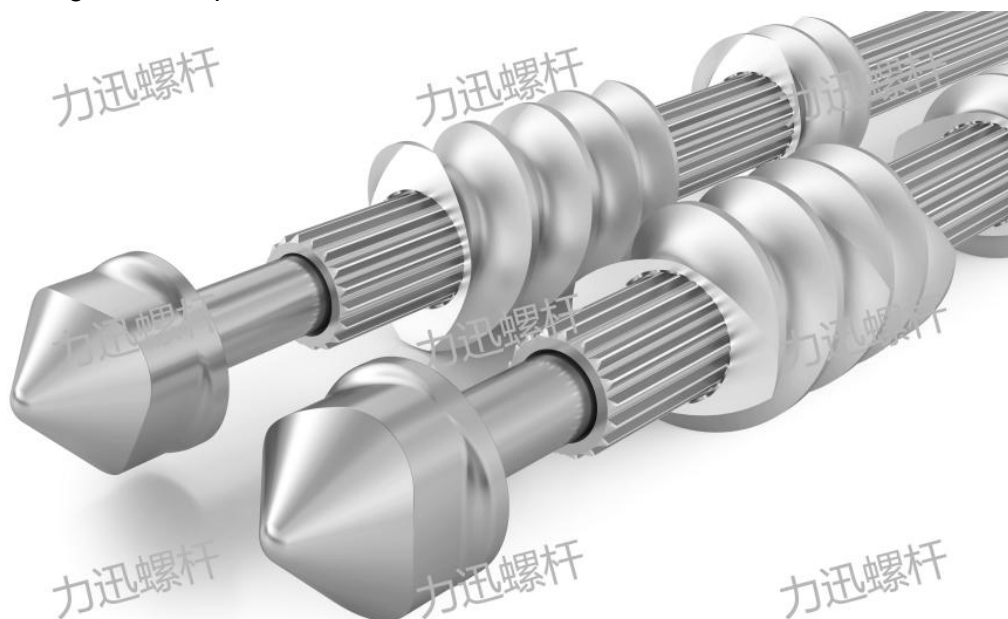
Assembly Diagram of Twin-Screw Shafts and Screw Elements
